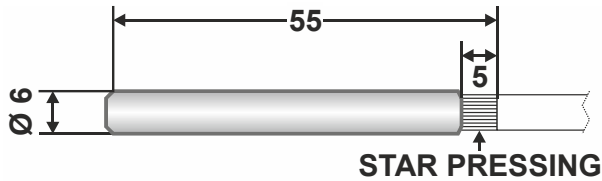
Dimensions of the cable-type bulb sensor in mm
